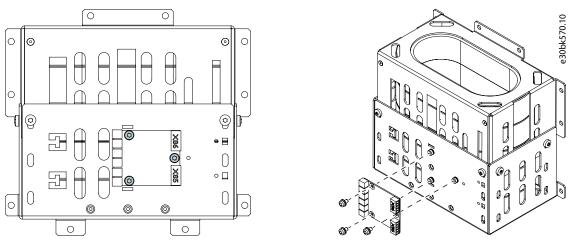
Mounting the AuxBus Temperature Measurement Board to the Filter
